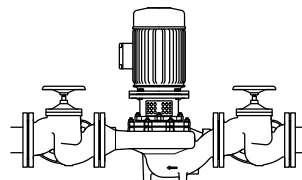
Vertical installation / mounted without pump foot, sizes 032-032-160 to 100-100-125
